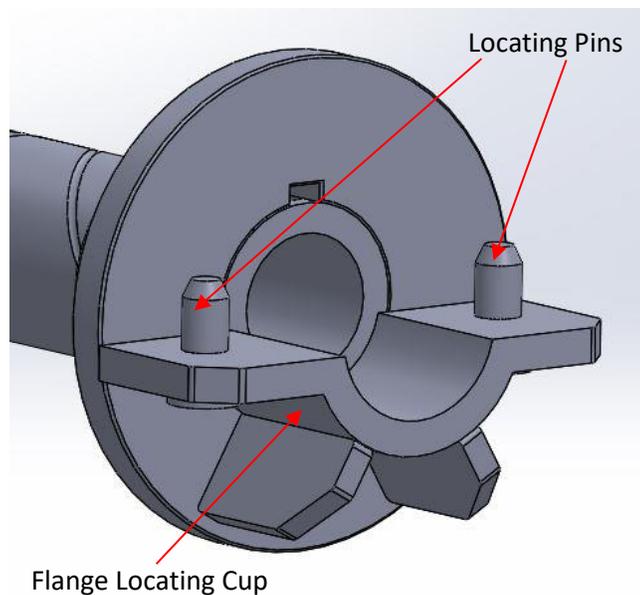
Drive End Iteration #1, Flange Hub and Flange Locating Cup
